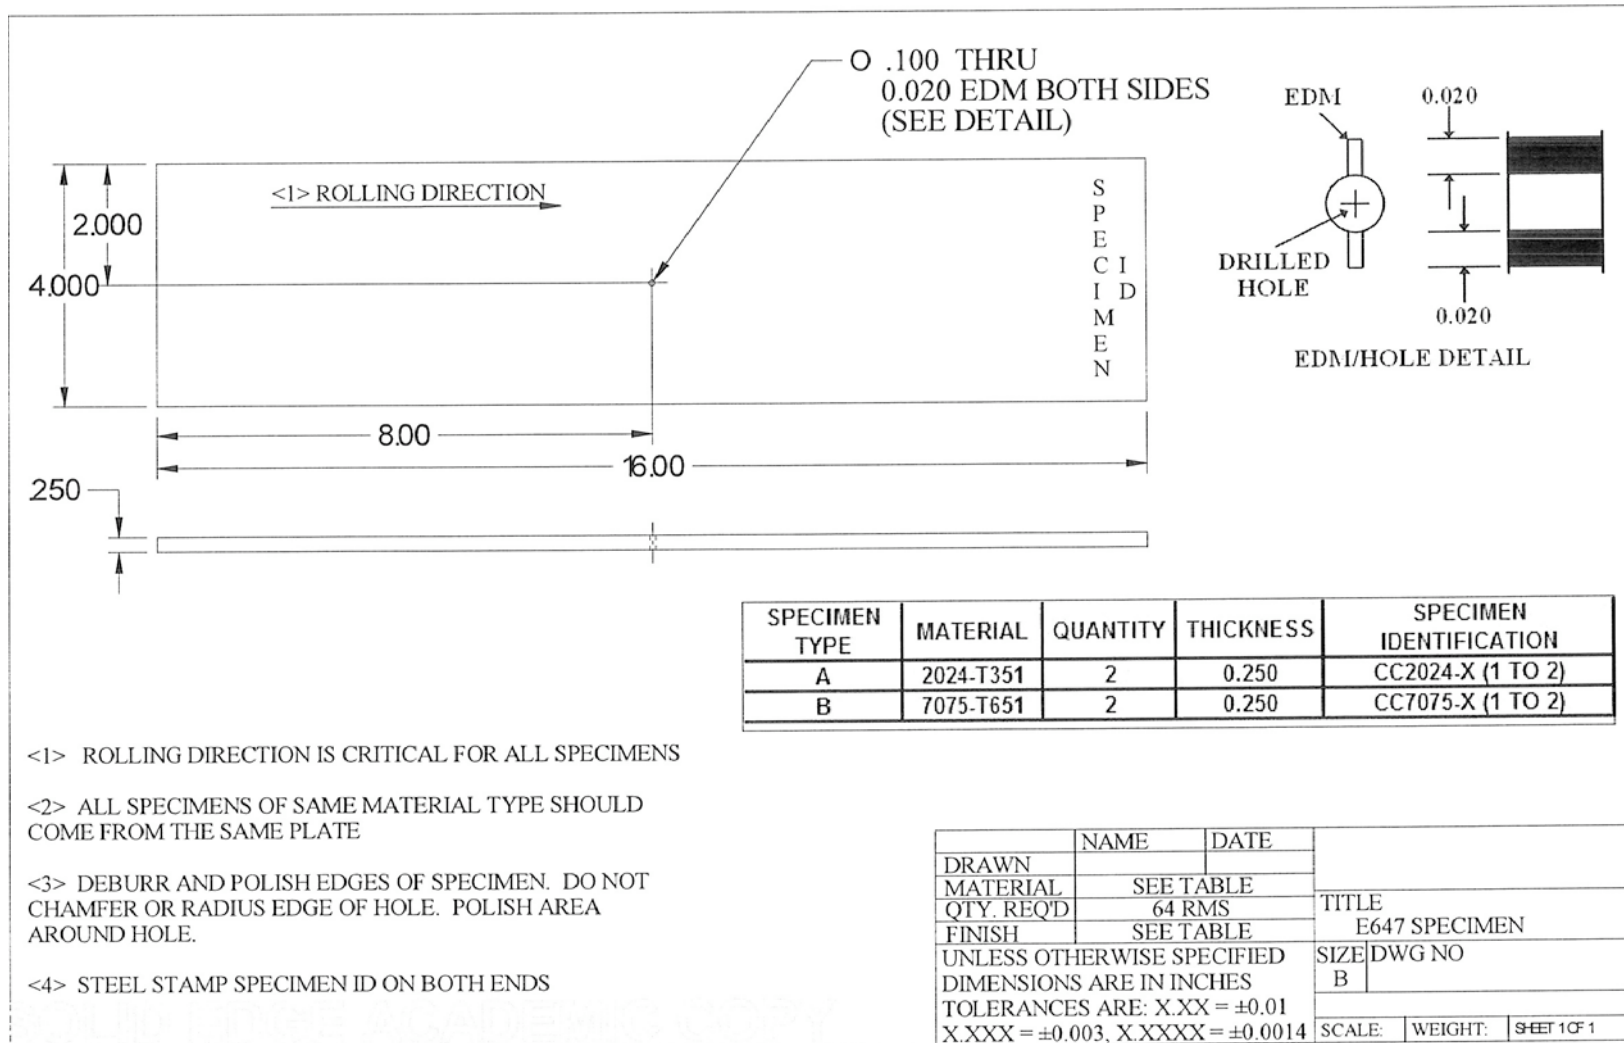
Manufacturing drawing of ASTM Standard E 647 fatigue specimens.
